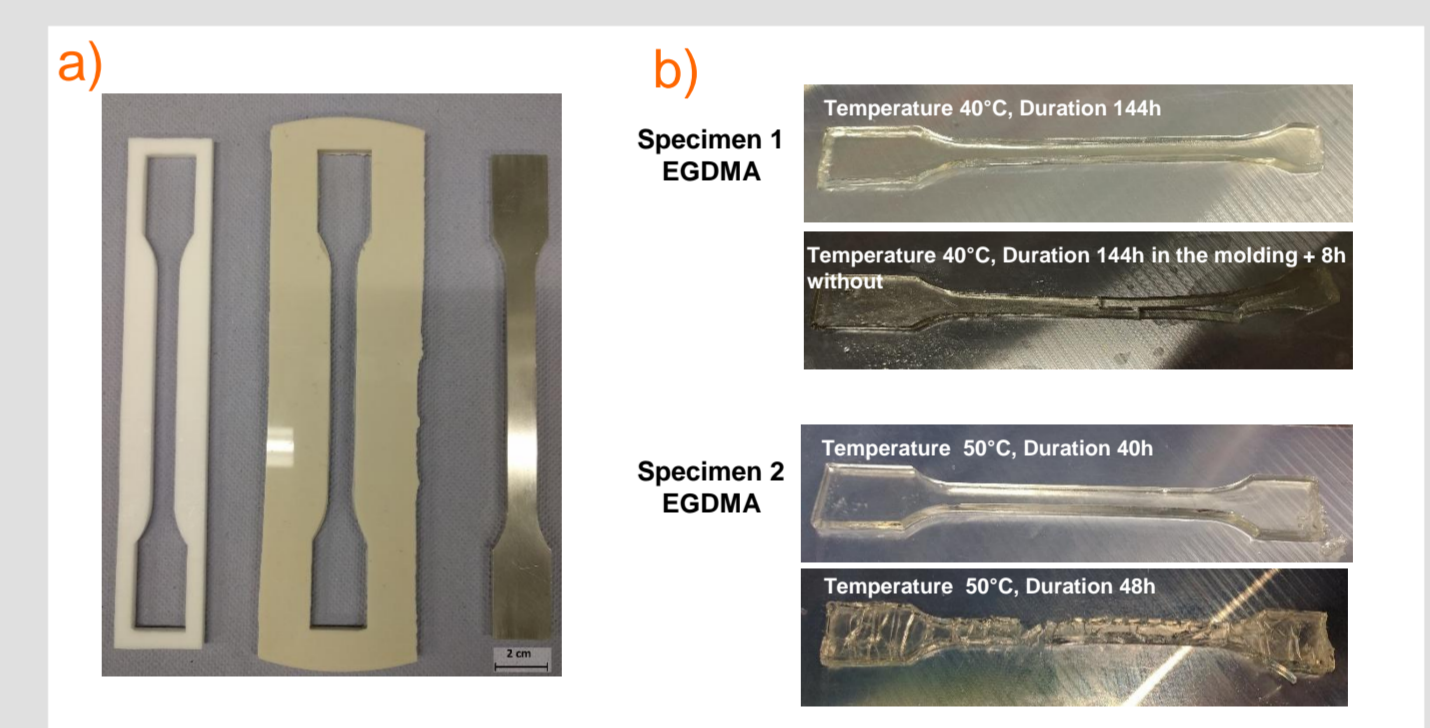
a) PTFE mold, PDMS mold and master structure for UV curing, b) cracks in cured specimen.
